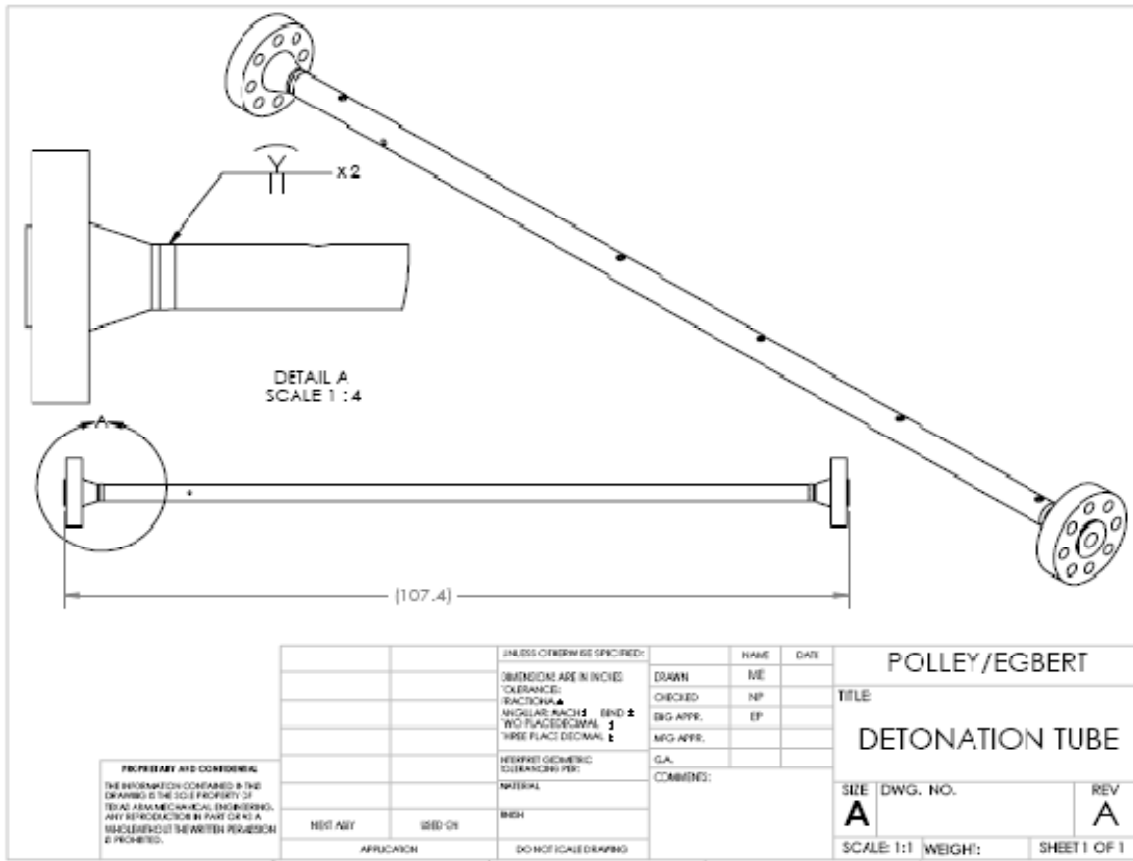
Drawing of the detonation tube with the 2500# flanges welded to the ends of the tube.
